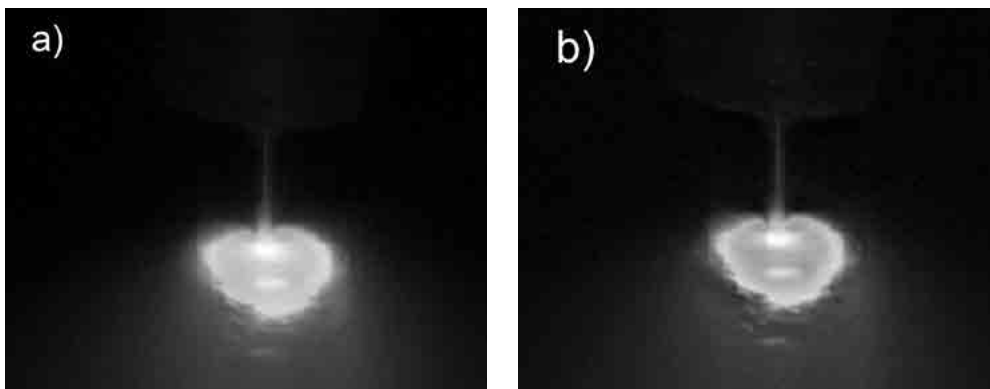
Exemplary images presenting a welding arc obtained by
